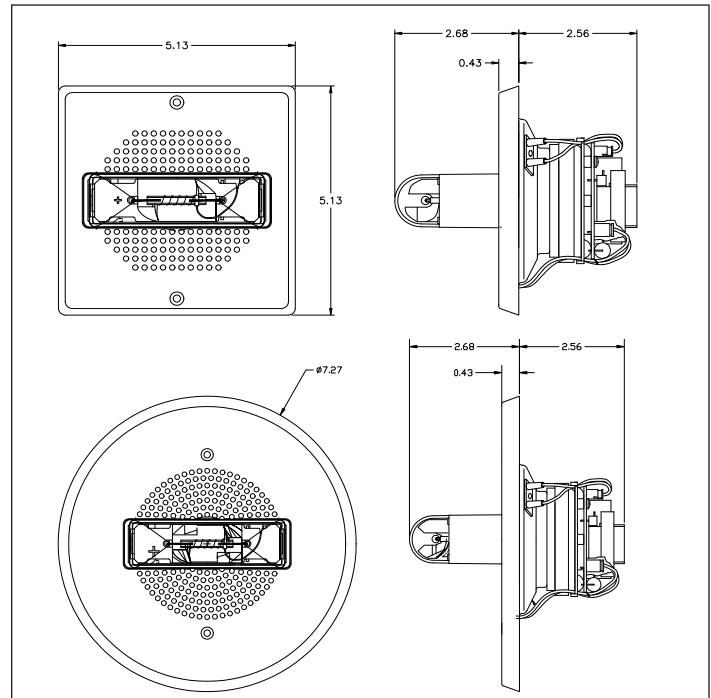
E70 (top) and E90 (bottom) Speaker Strobes - Front & Side Views
